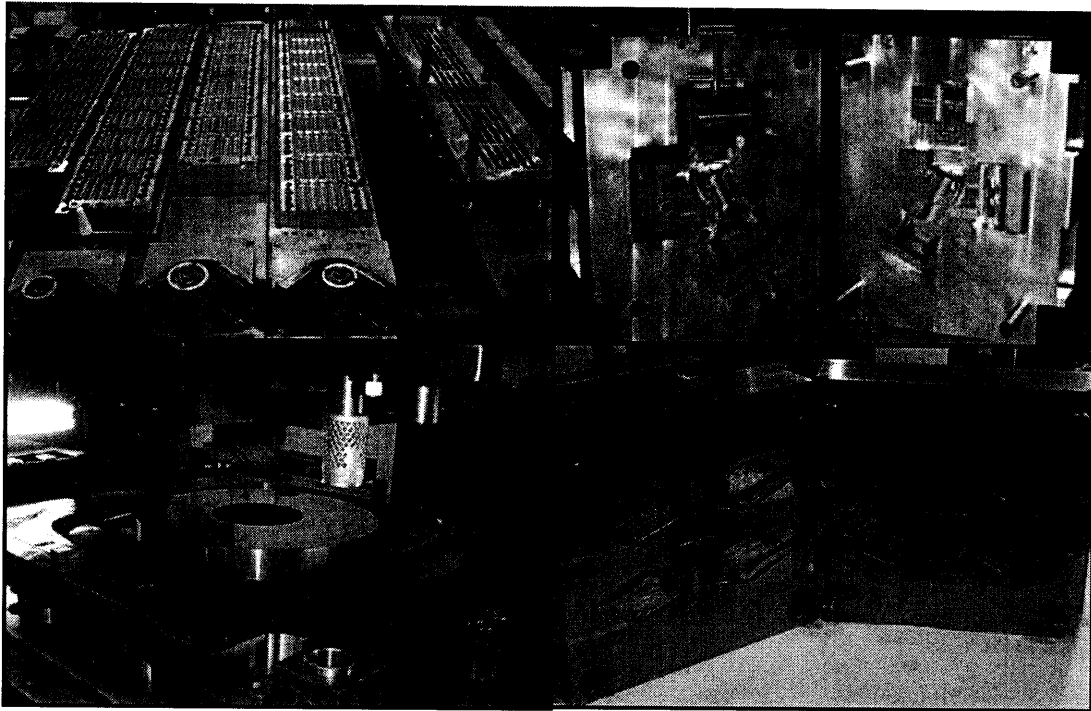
Durable tooling – sheet metal stamping (left) and plastic injection molding dies (right).
